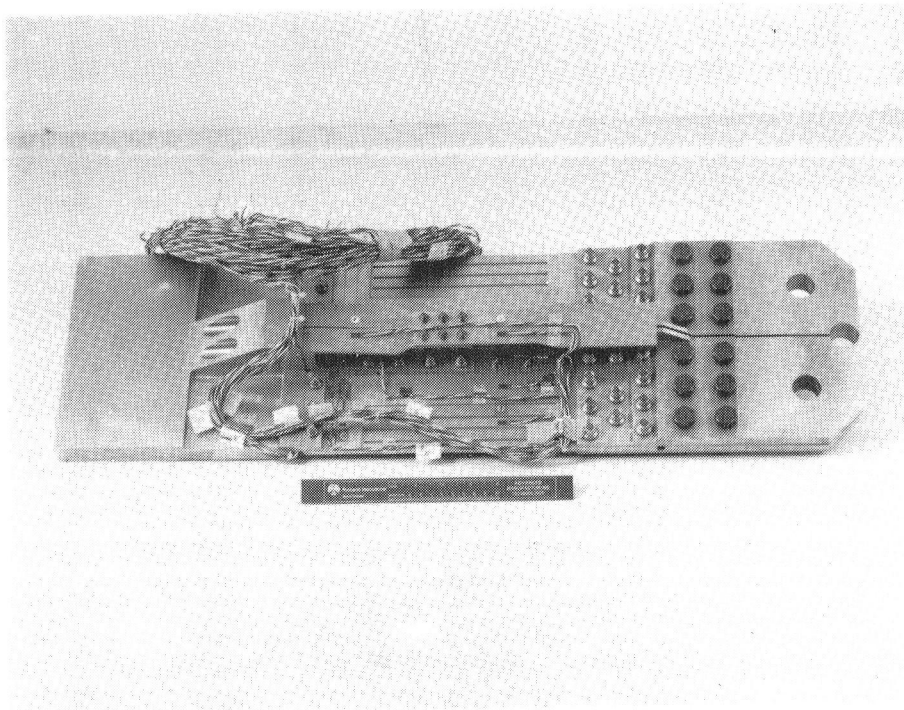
Boilerplate-Panel Corner Specimen (B-PCS)—Inboard Side of Completed Boilerplate Specimen with Strain Gauges Attached
